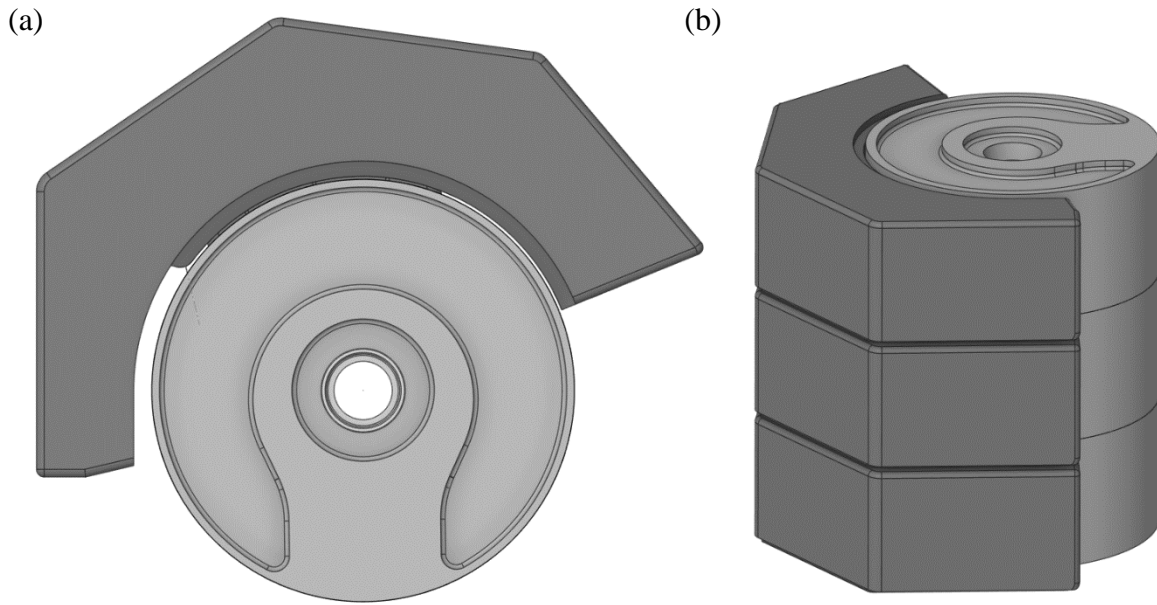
(a) Representation of the full modular assembly of the machine and the inverter. (b) Stacked motors assembly.
